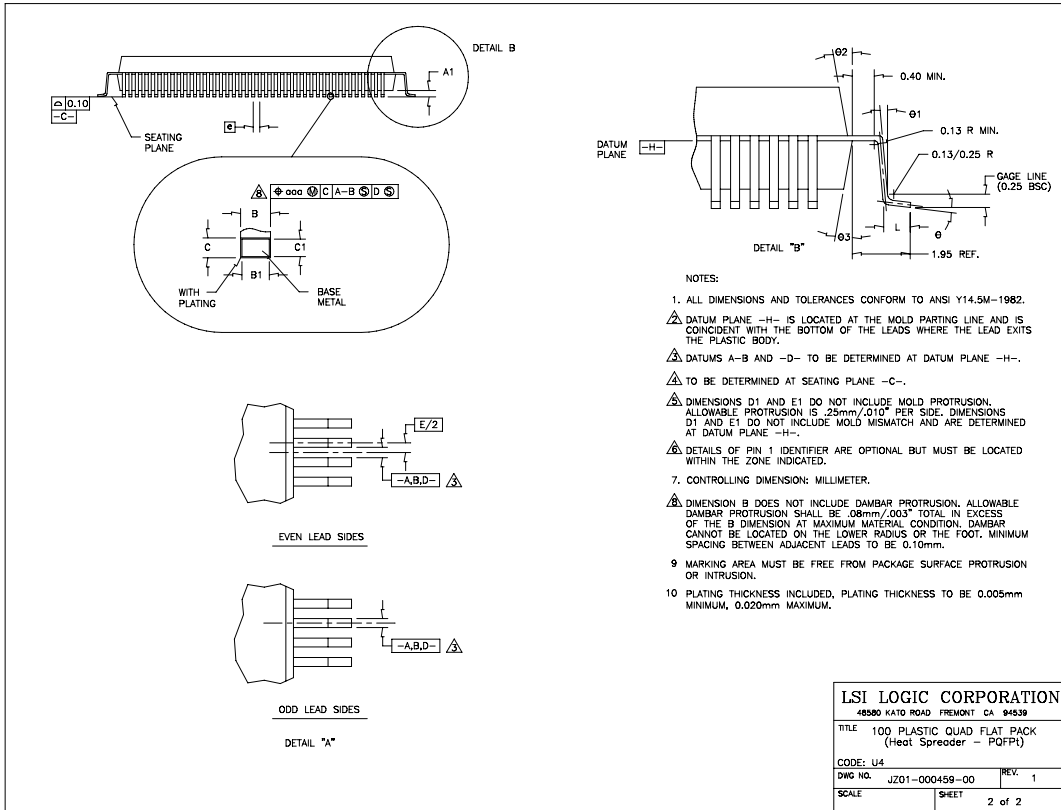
is a mechanical drawing for the 100-pin PQFPt L64734 package.
